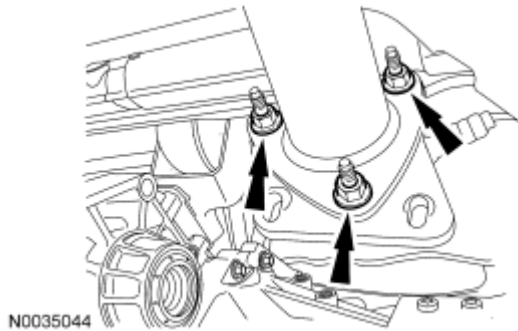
Locating Flexpipe On Exhaust Manifold & Nuts
